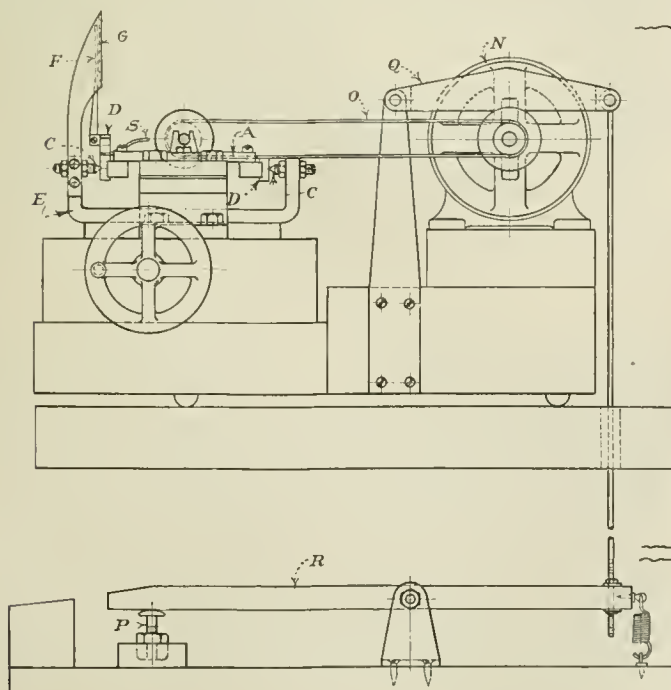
END VIEW OF BALANCING MACHINE WITH MOVABLE FULCRUM
